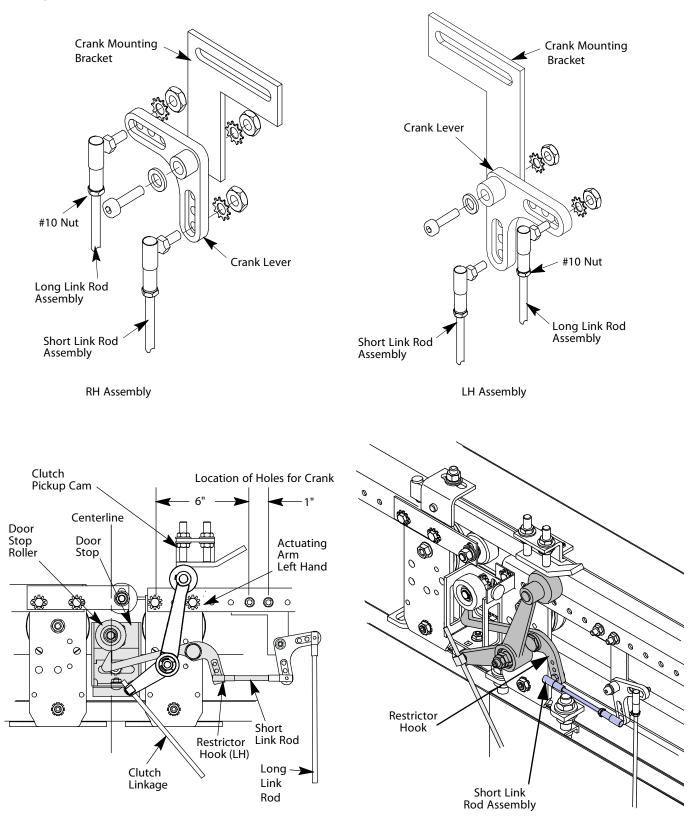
Attach Crank Lever Assembly to Door Link Angle
